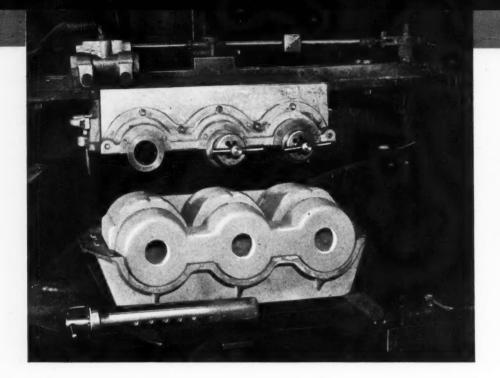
Barrel Core Immediately after Blowing in Core Blowing Machine. Two Pins that Form Cavities are in Position for New Core. Third is Shown in Front
